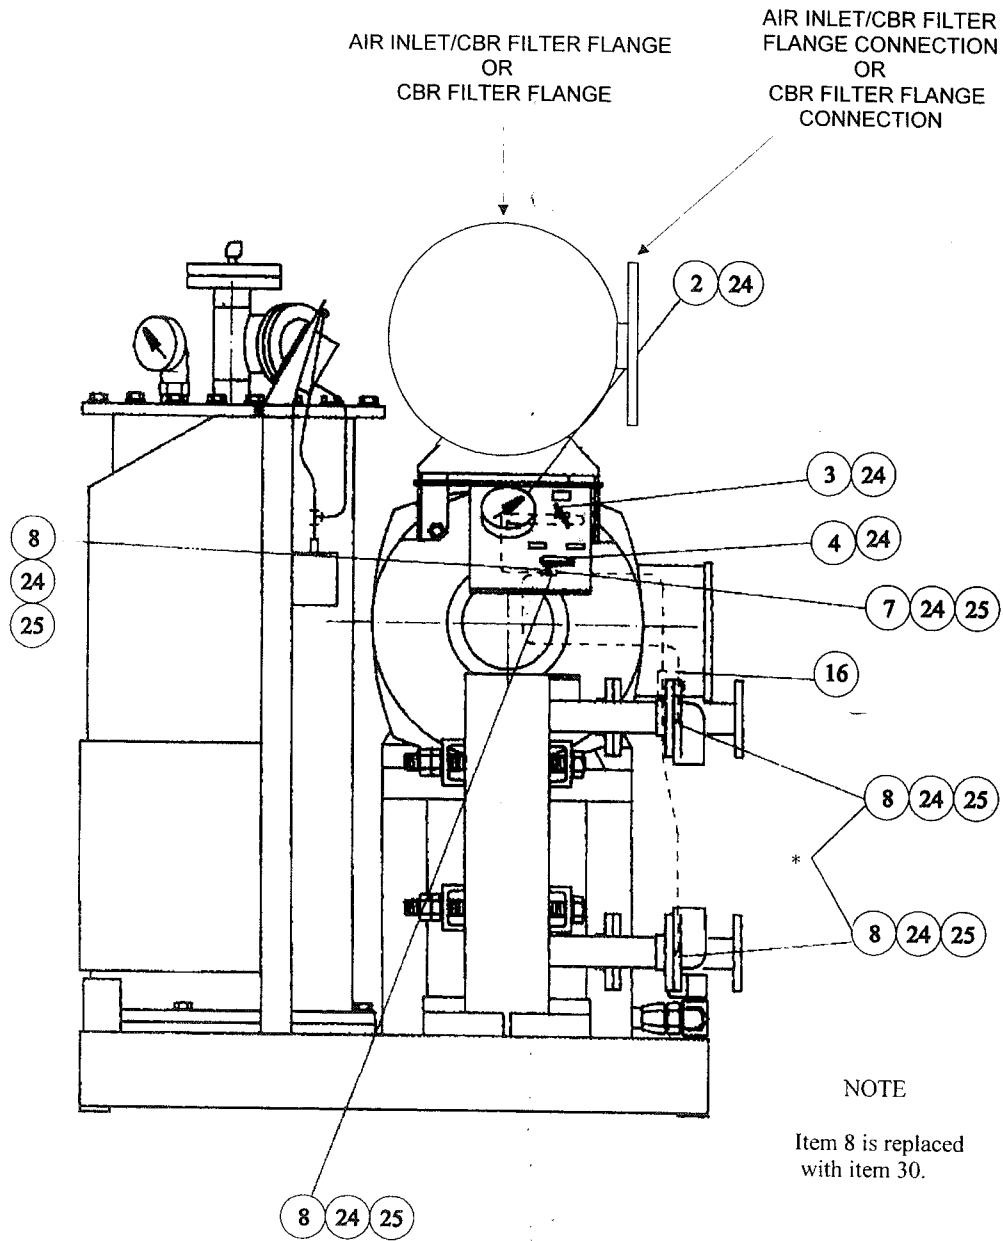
Instrumentation Arrangement (sheet 3 of 3)
